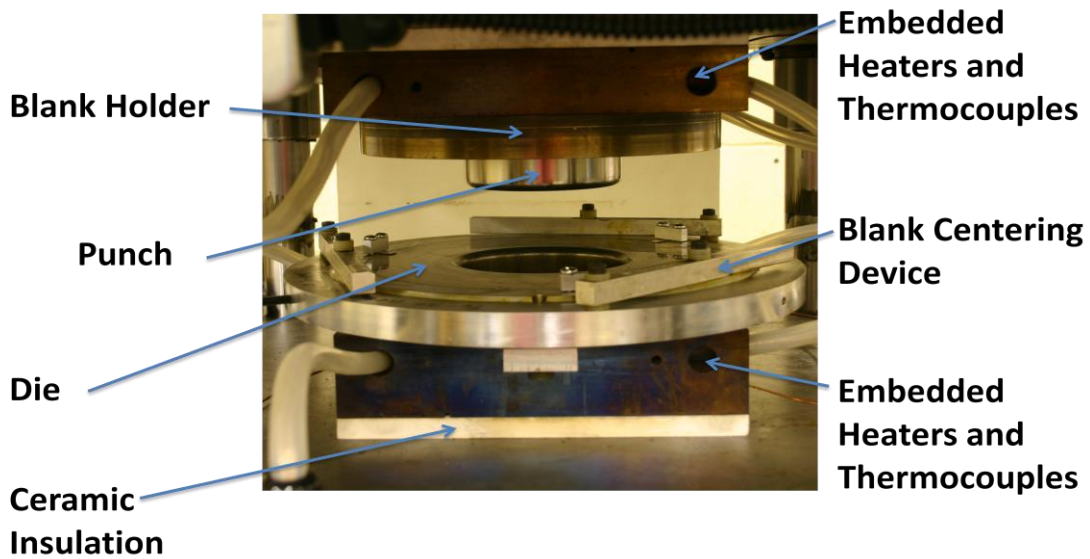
Close up view of warm deep drawing die, blank holder, and punch.
